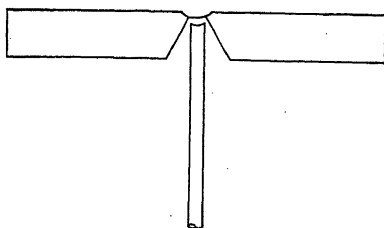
End view of overhead butt weld showing incorrect position of electrode.
